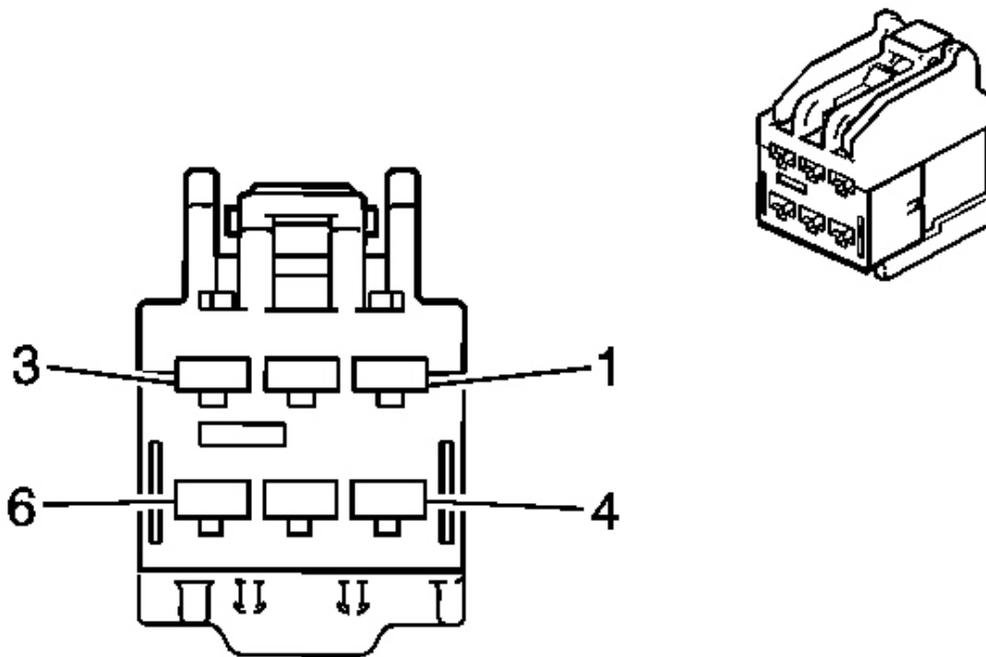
Heated Seat Control Module - Driver X1 Connector End View
